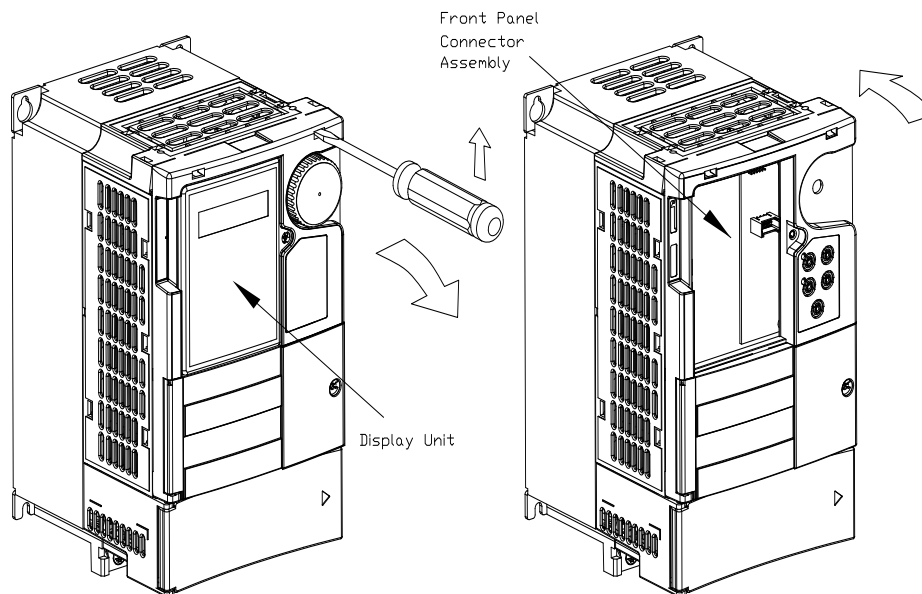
Front Panel Removal/Front Panel Connector Assembly.
